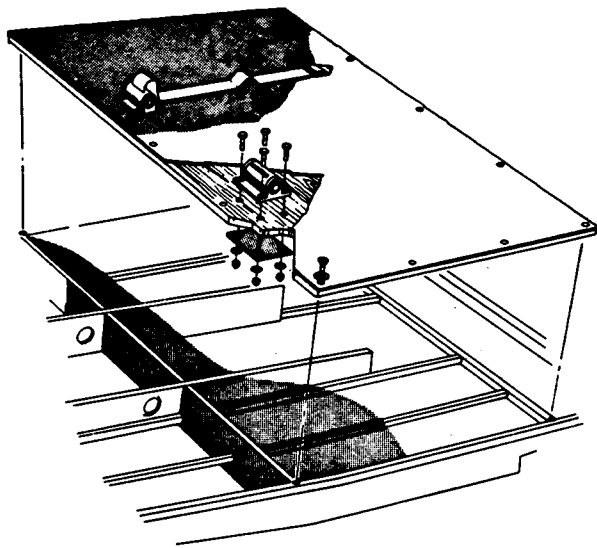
Typical floor mounted inertia reel installation.
